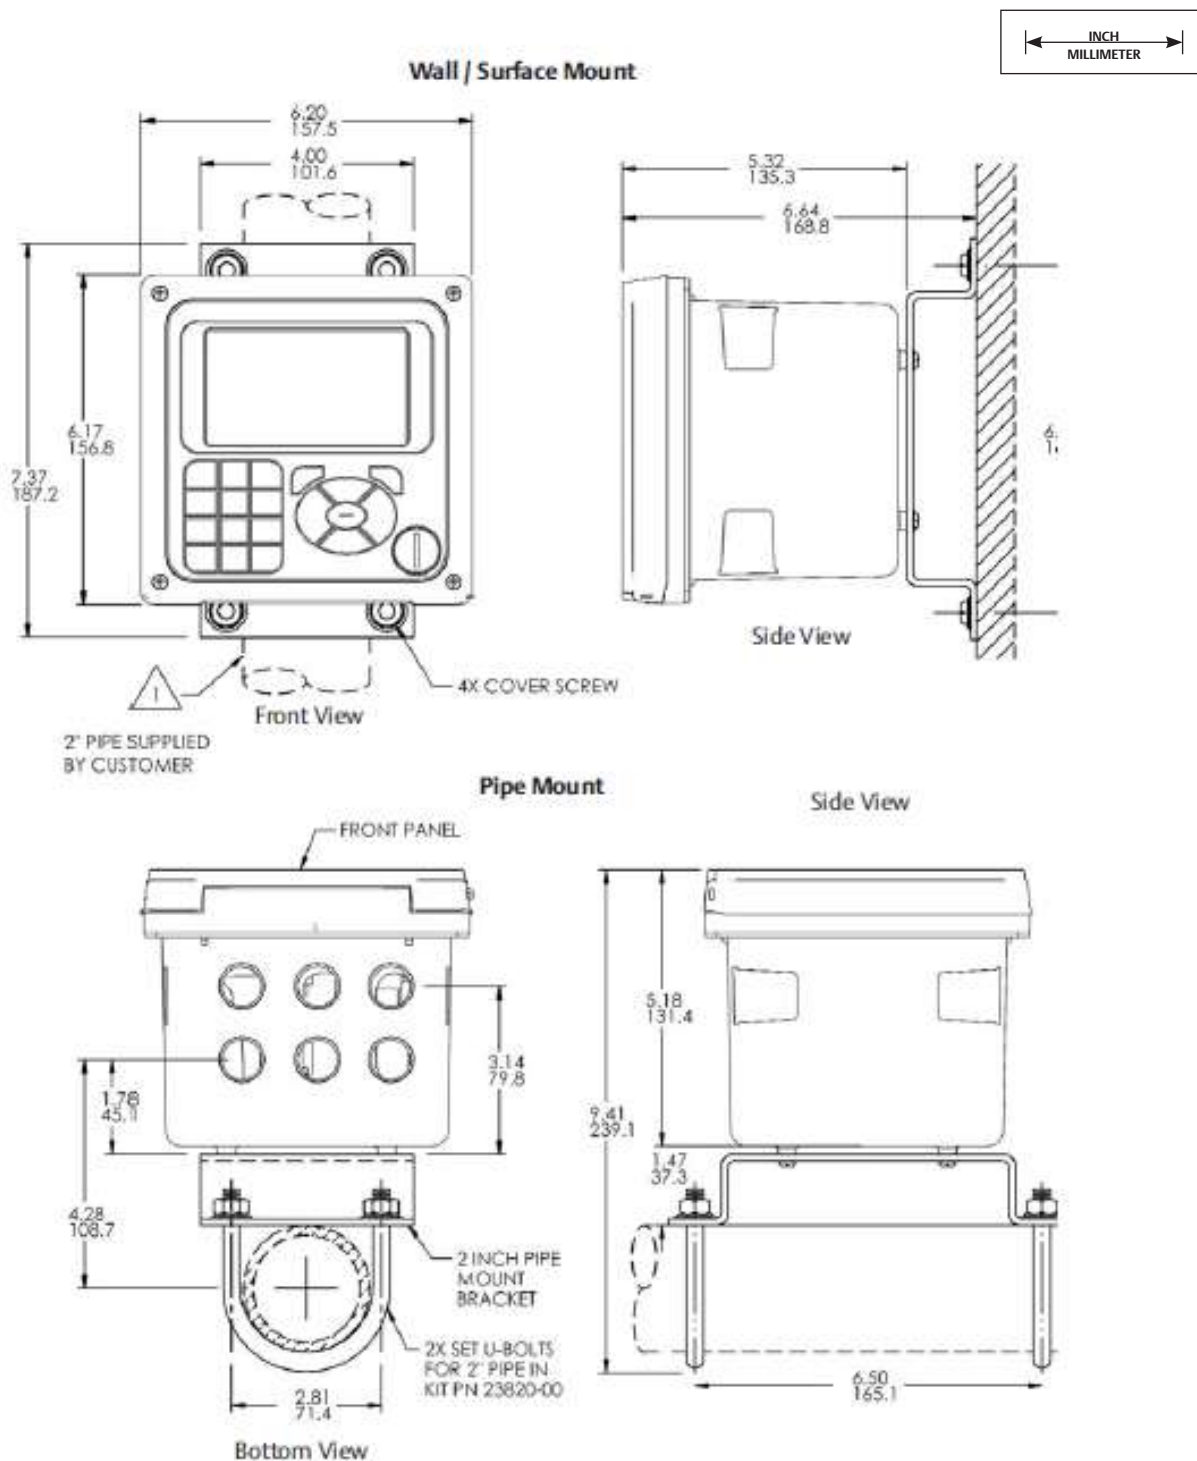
Rosemount 56-24 Pipe/Wall Mount Installation
